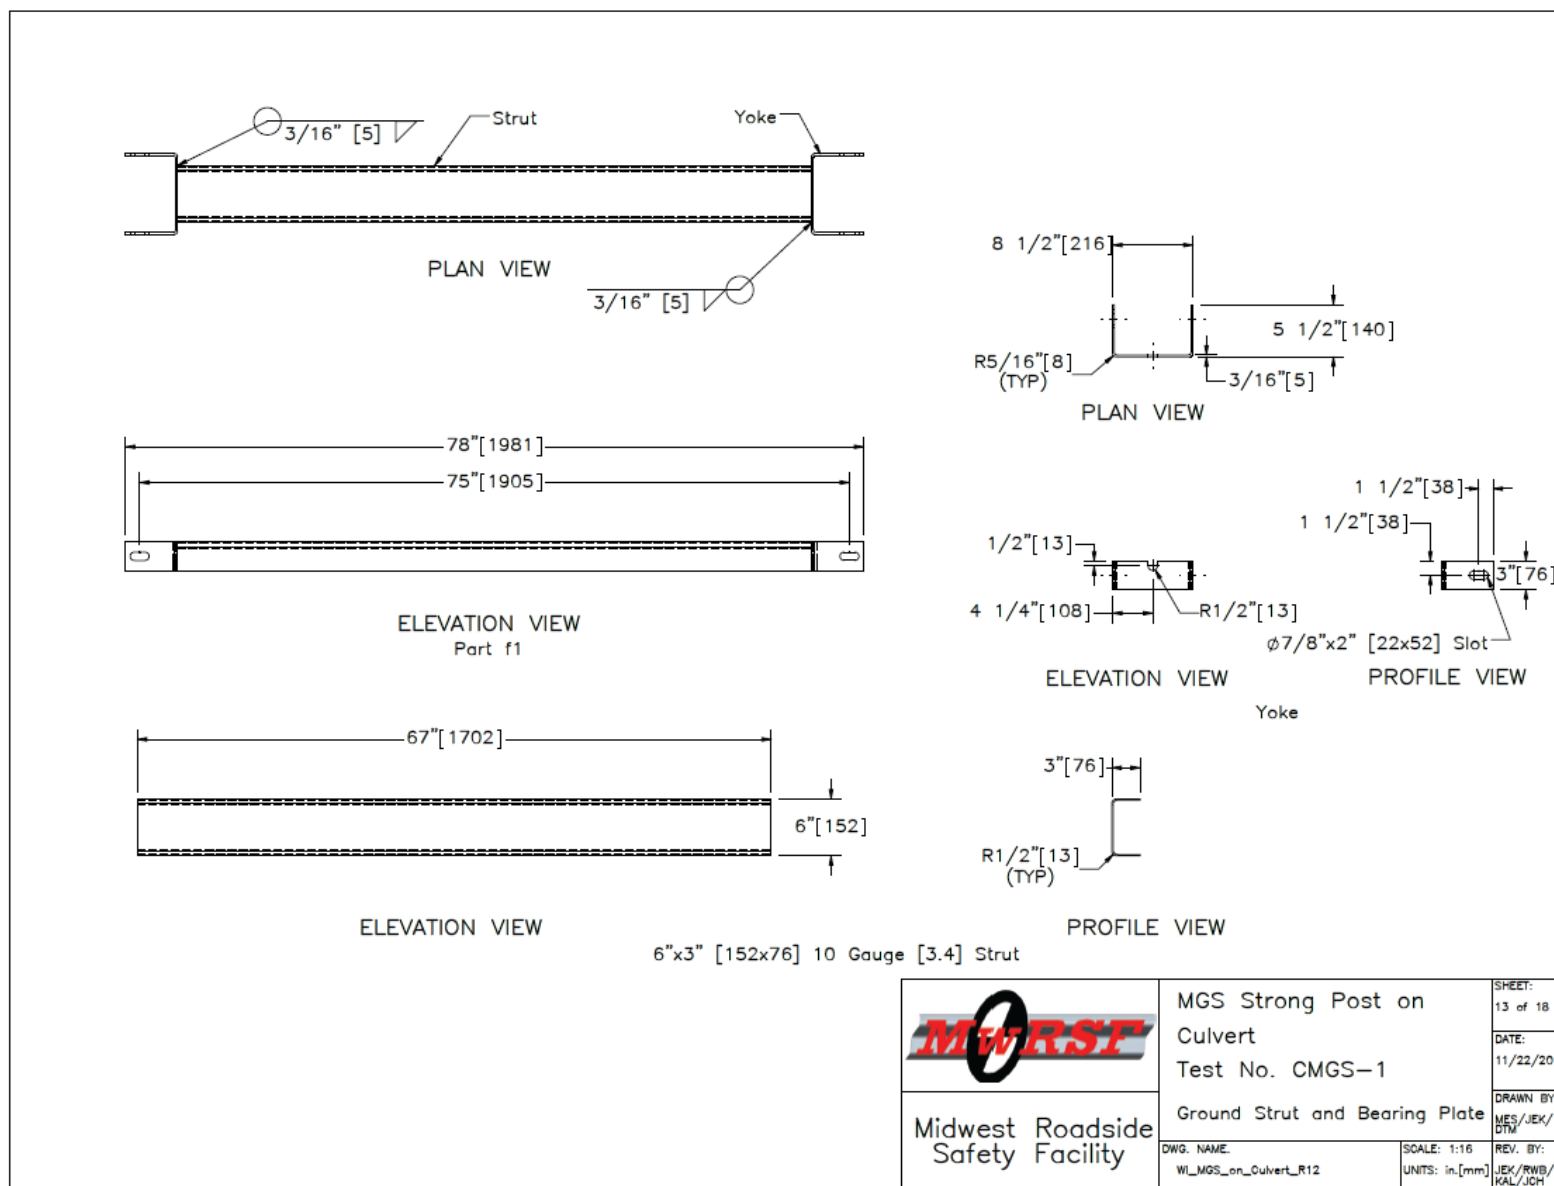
Ground Strut and Bearing Plate, Test Nos. CMGS-1 and CMGS-2
